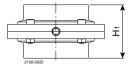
LKB with welding ends Note! LKB sizes DN 125 and 150 are with six screws.
